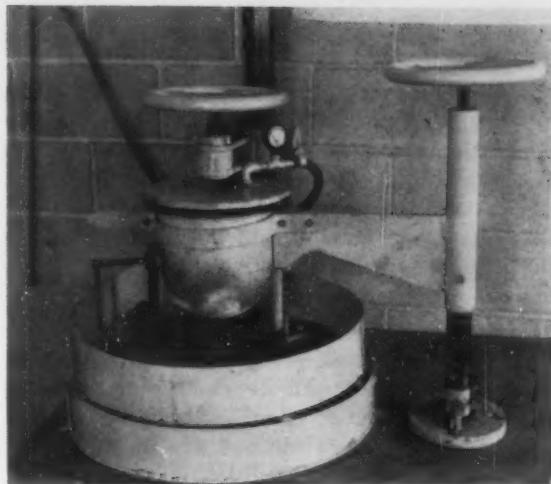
Diemaking machine used to form the soft metal dies that mold the wax patterns.
